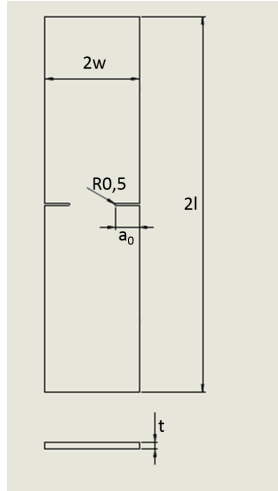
Geometric representation of the Double-Edge Cracked specimen used for compressive tests.
